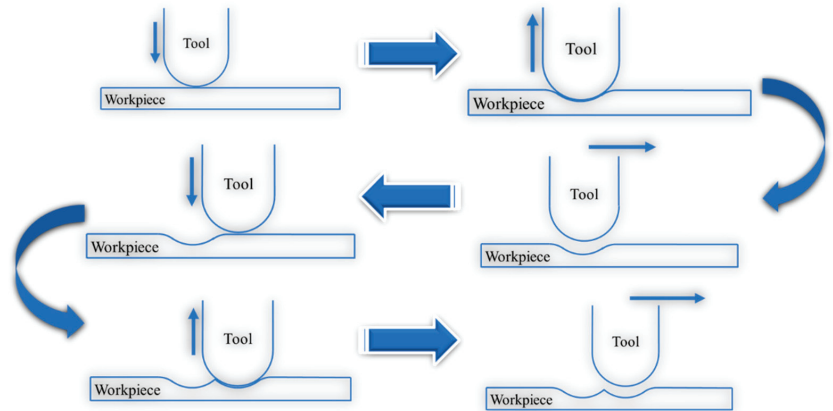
Schematics of deformation of the workpiece based on linear tool movement with hammering.
